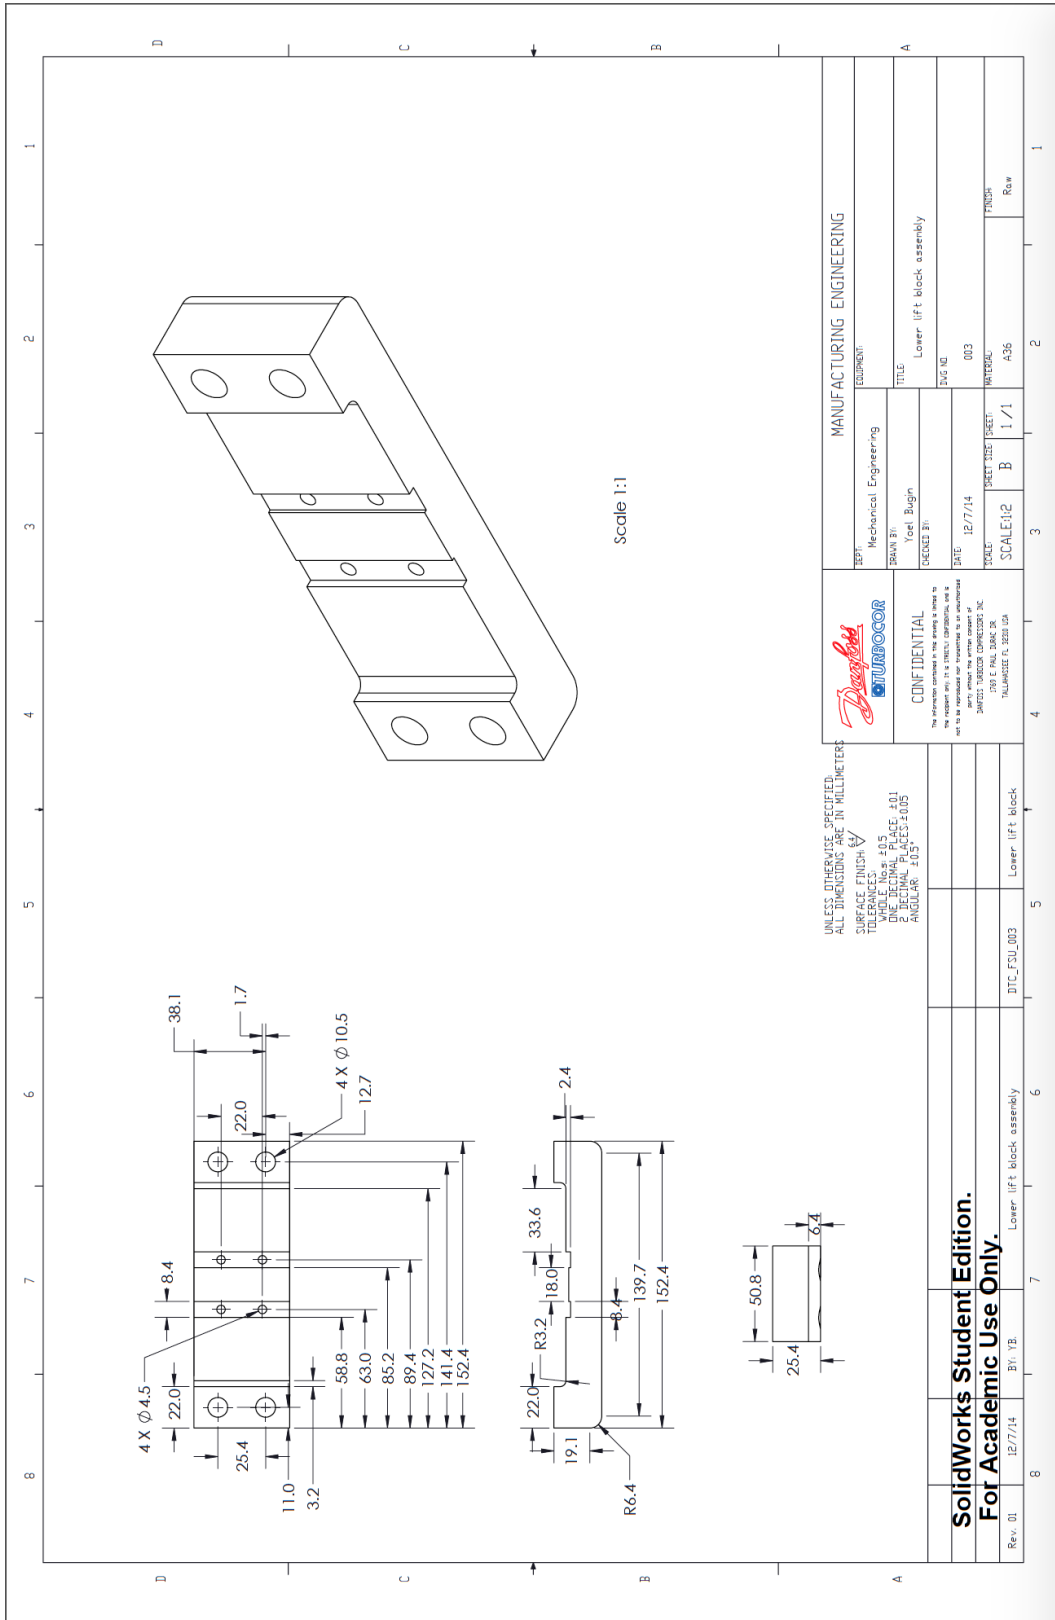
Drawing of Lifting Point Adjustment Block (1)
